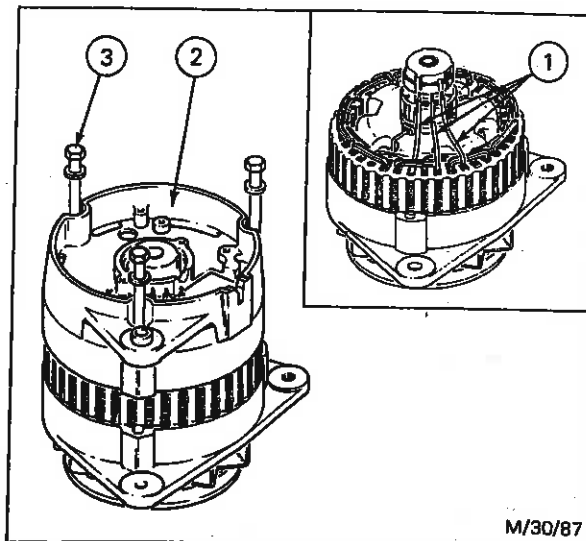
Assembling Stator and Slip Ring End Bracket
